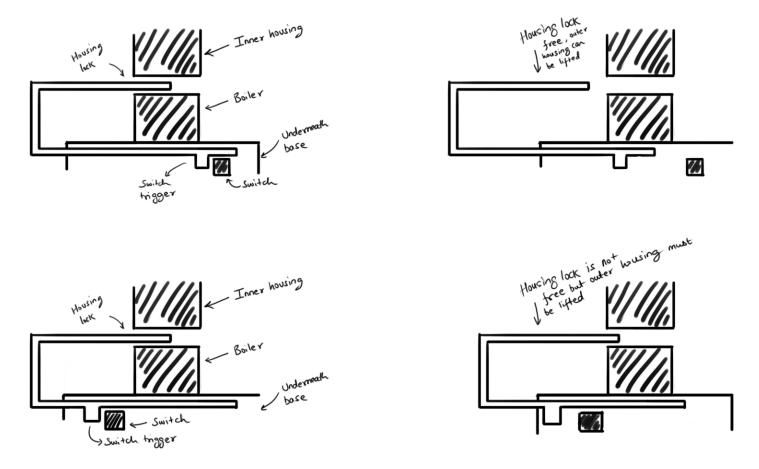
Example of how the position of the housing lock and the switch trigger could impact the method of taking the outer housing out
